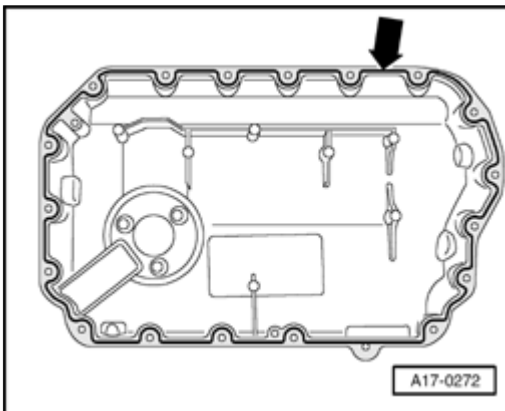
Applying Sealant Bead To Clean Sealing Surfaces Of Oil Pan (Lower Part)
